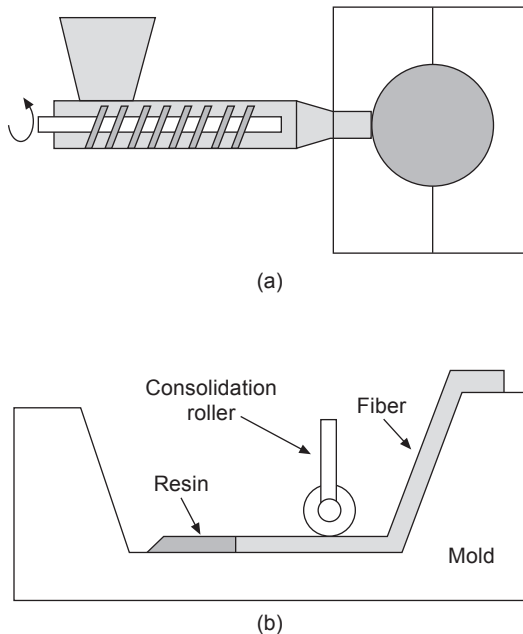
Sketches of (a) injection molding and (b) hand lay-up.
